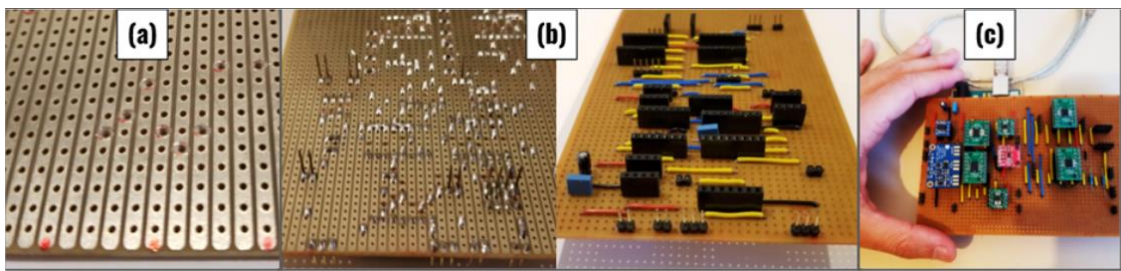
Fabrication steps for electronic circuits using stripboards: (a) interruption of strips, (b) soldering of connections and (c) assembly of components.
